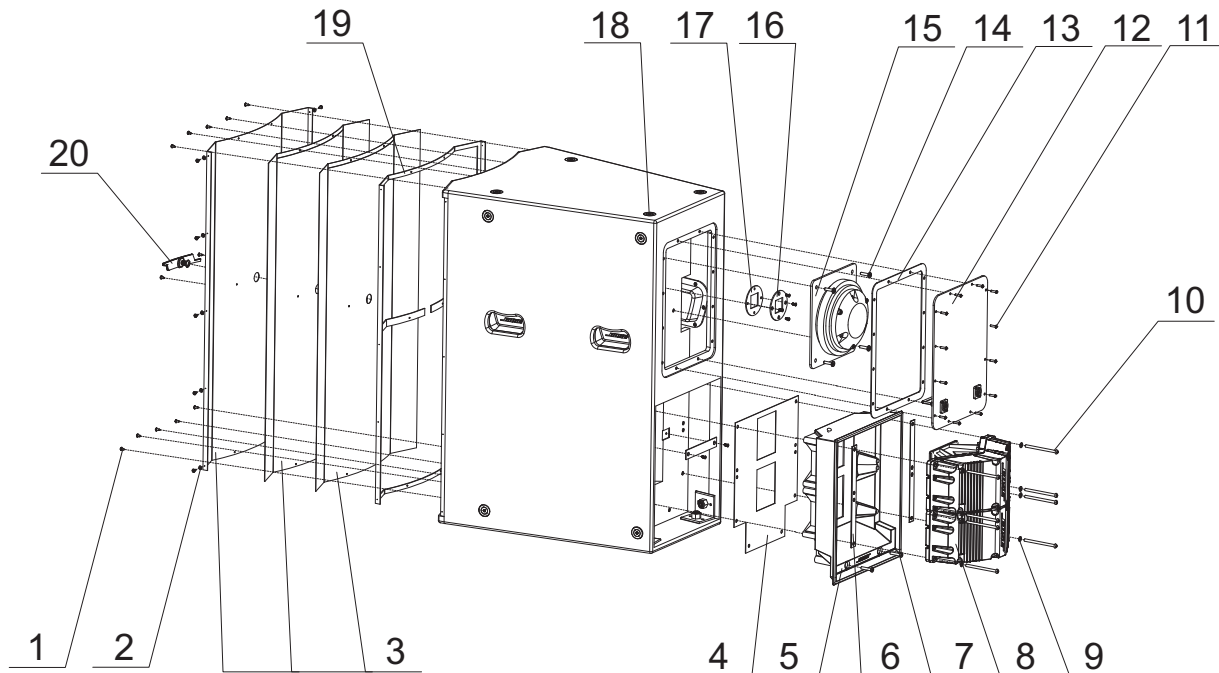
Panaray LT 4402 WR Loudspeaker Exploded View
